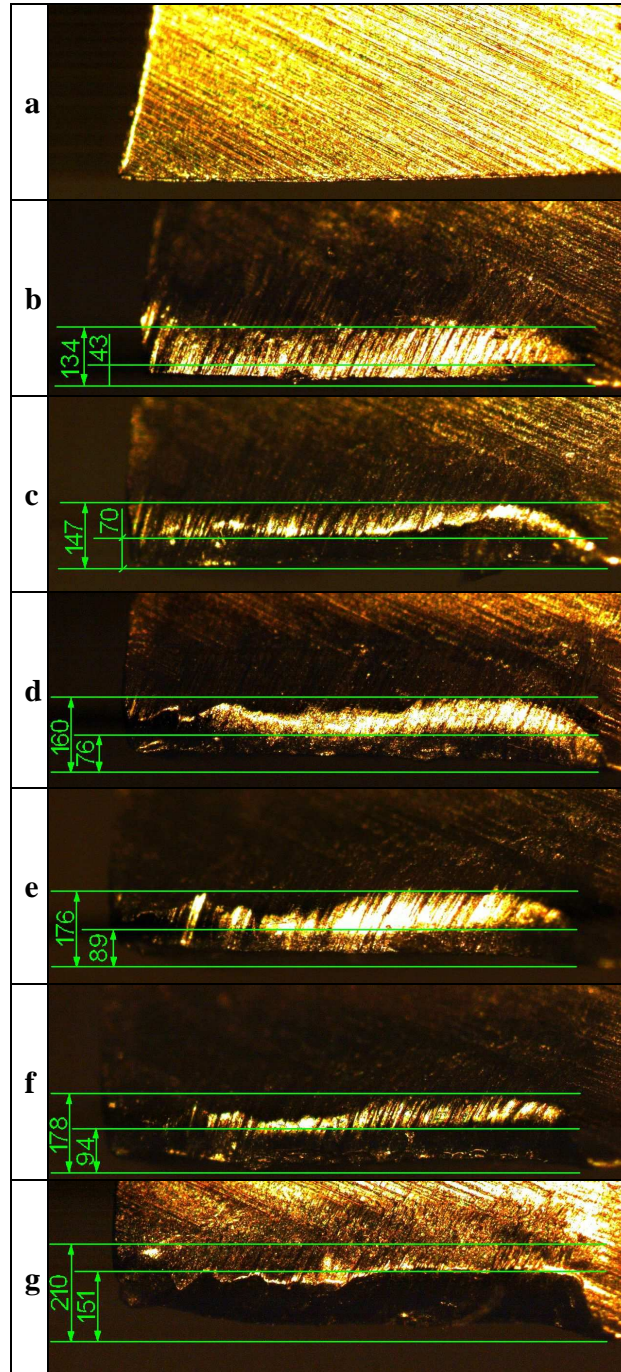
MTE 9mm end mill tooth # 2 trochoidal toolpath rake face wear a) Fresh tool, b-g) After pass 1-6 (each 54 mm length, 27 mm width, 1 mm depth).
